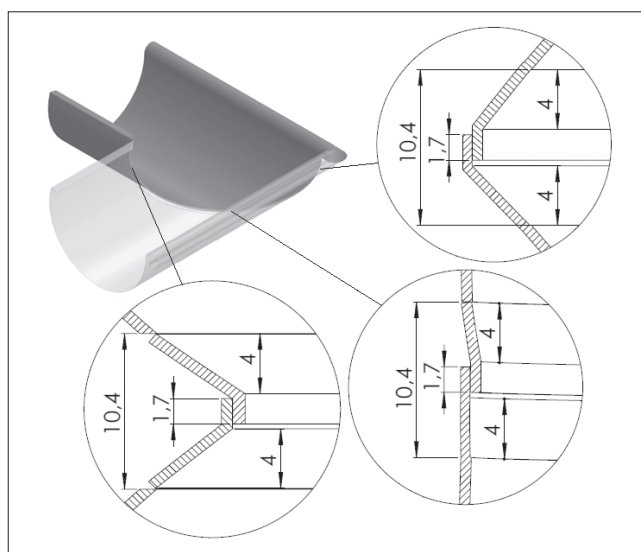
Overlap and pressing area in the course of the weld
